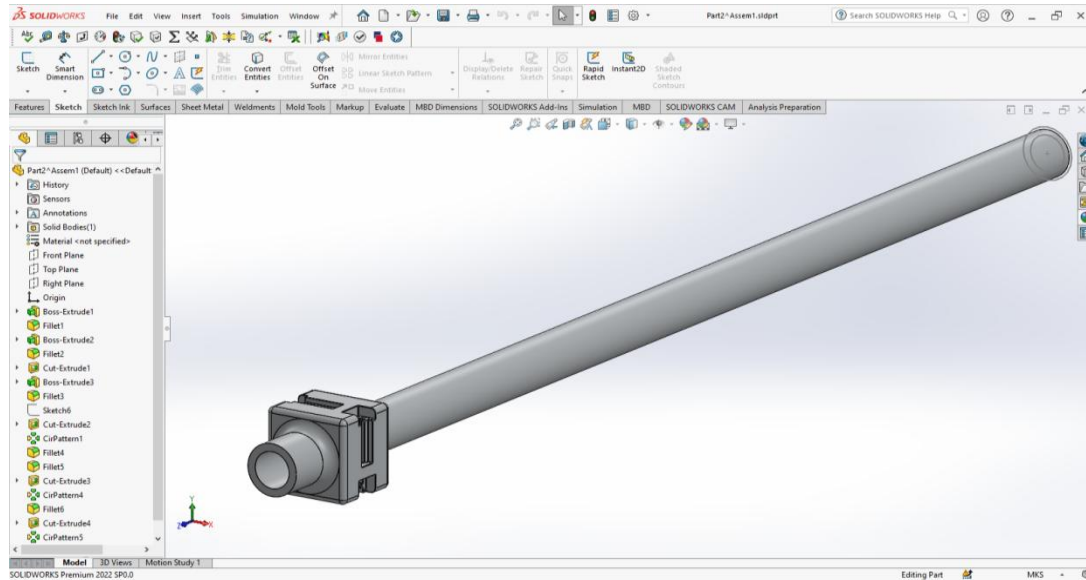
3D Representation of the push-pull rod and yoke assembly
